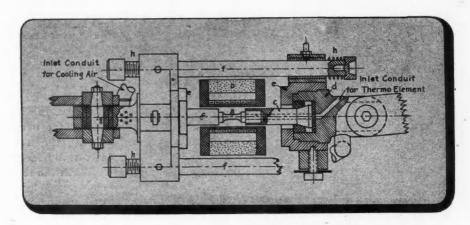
Diagram showing the method used to lock the test specimen in the testing machine. (a) test specimen, (b) heater, (c) fixtures provided with bore for the insertion of thermo-element, (d) chuck head, (e) nuts with attached parallel guide sleeve. (f) guide bars, (g) rubber bearing, (h) springs.
